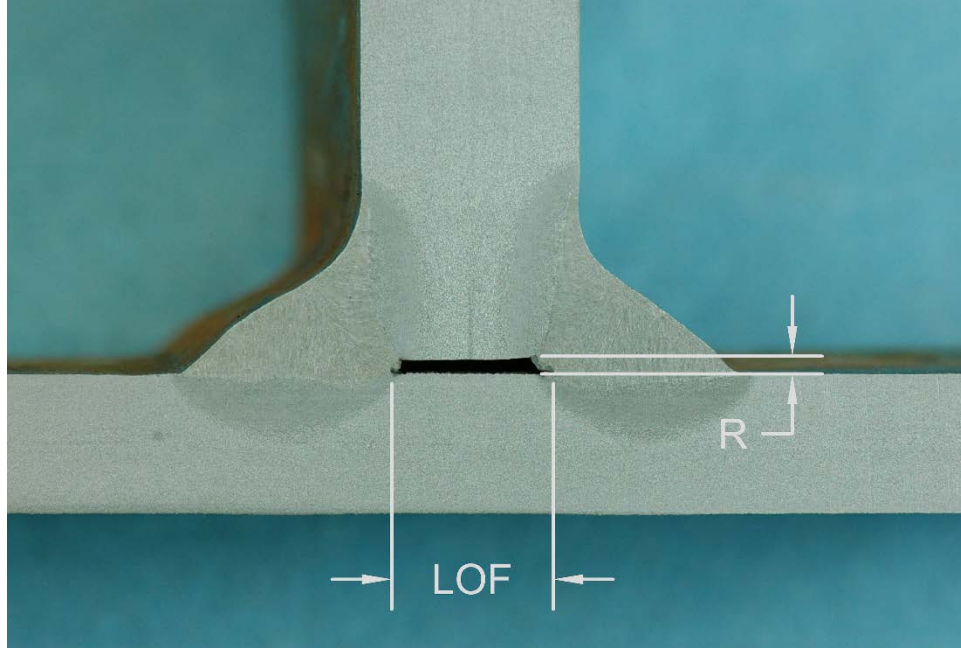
Identification of parameters for rib-to-floor beam weld
